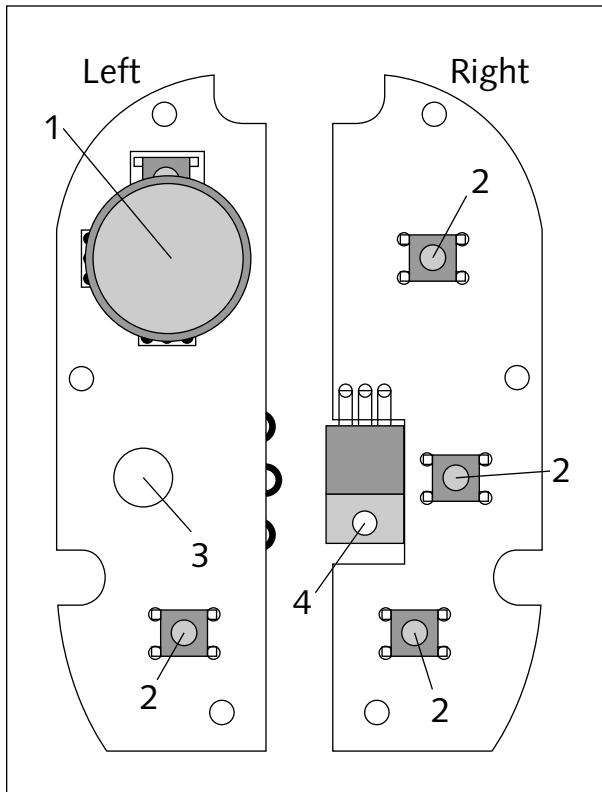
Parts placed on the front of the left and right control boards.
